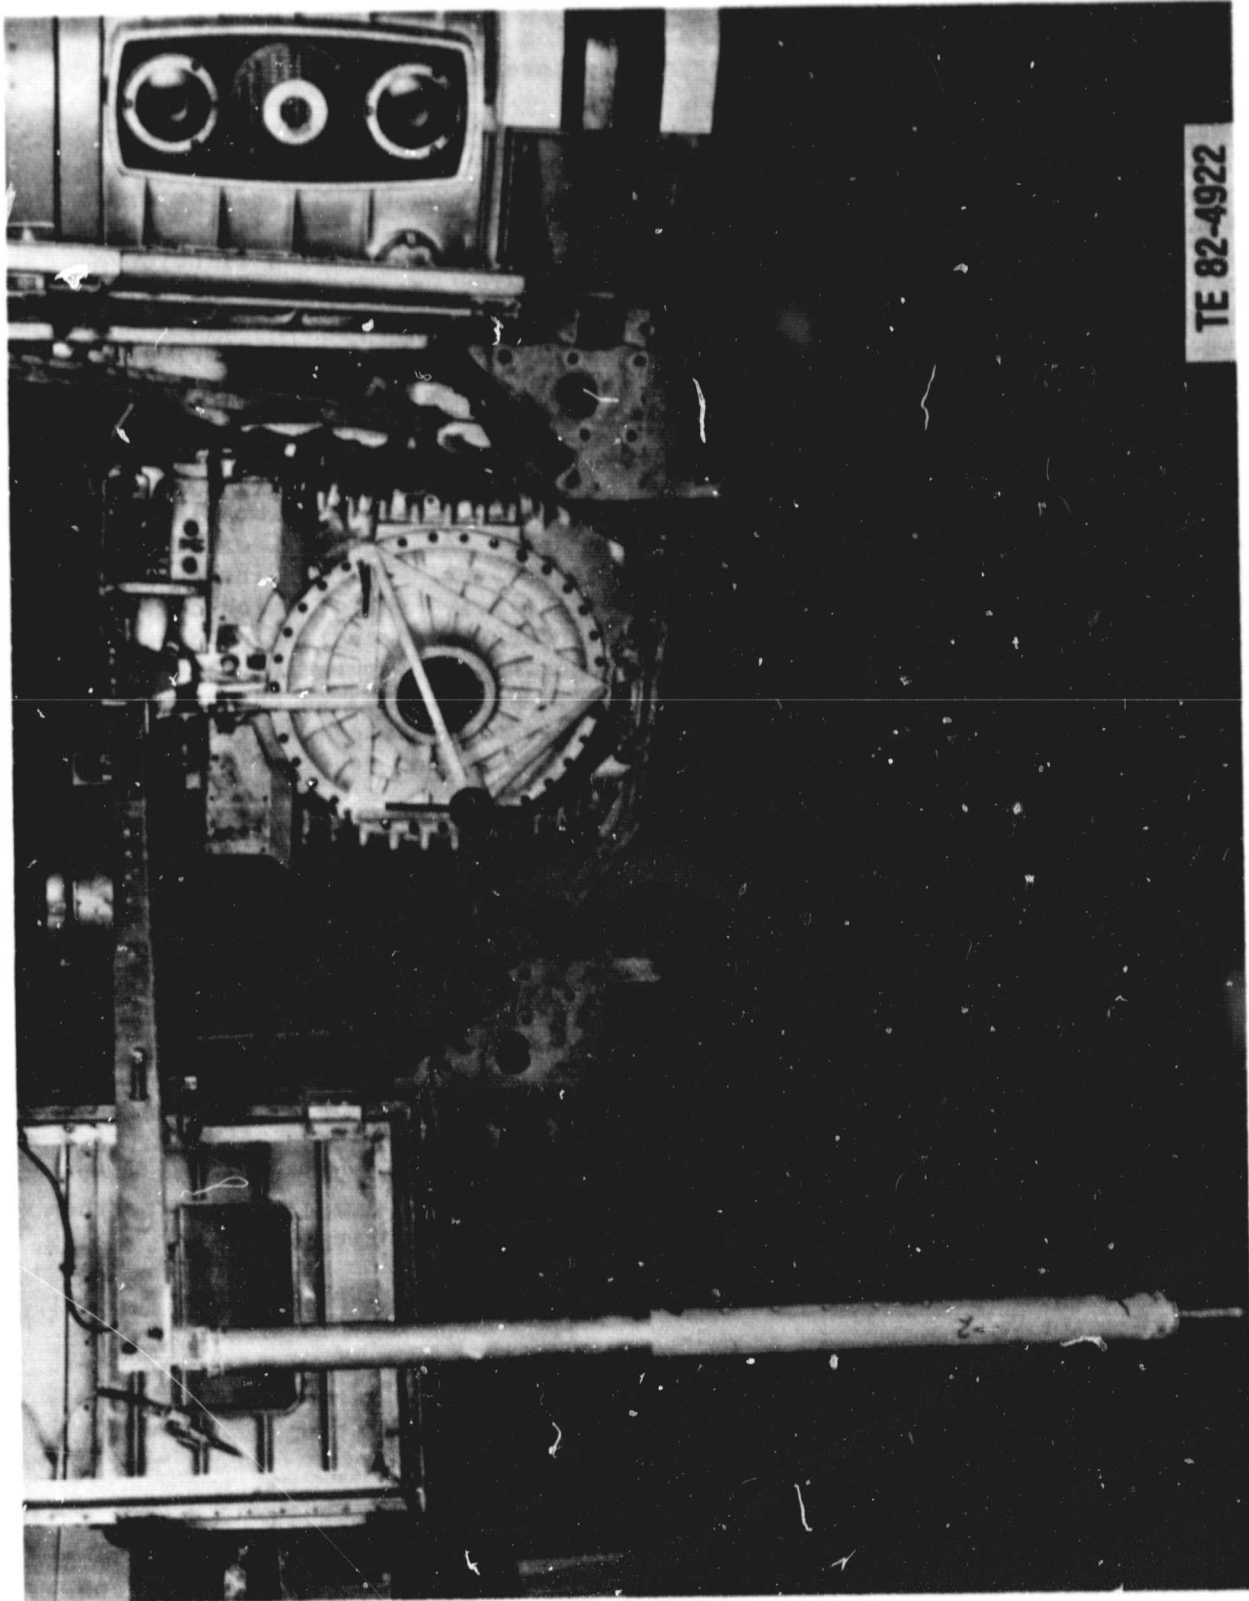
Failed compressor impeller from Greyhound engine S/N T9
